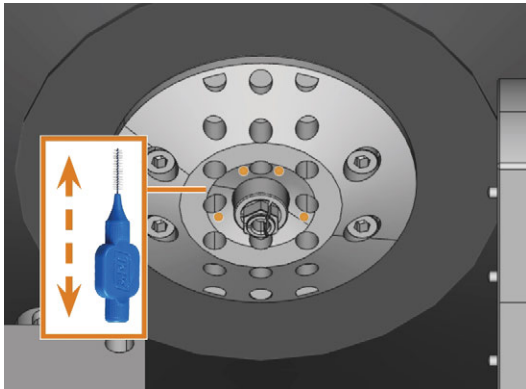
CLEANING THE NOZZLE PLATE; NOZZLES MARKED ORANGE (THE NUMBER OF NOZZLES IN YOUR MACHINE MAY BE DIFFERENT)
